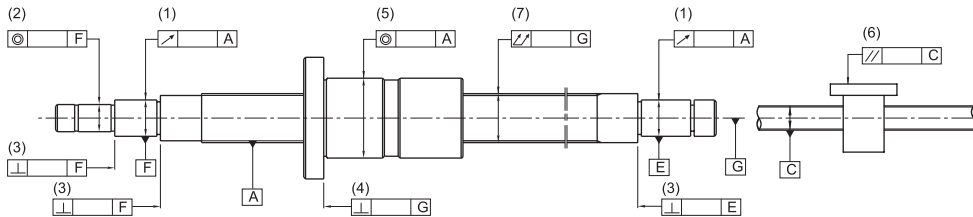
Mounting Accuracy and Tolerance
